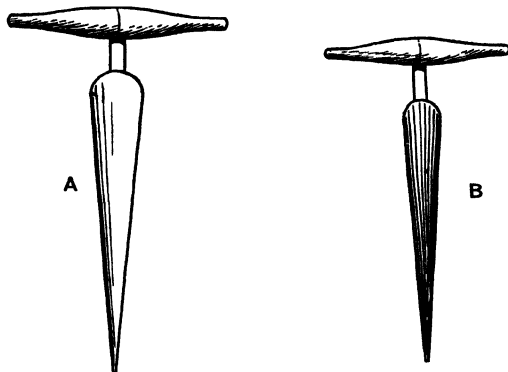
(A) Lousse or Peghole Bore, and (B) Cut Steel Reamer.
